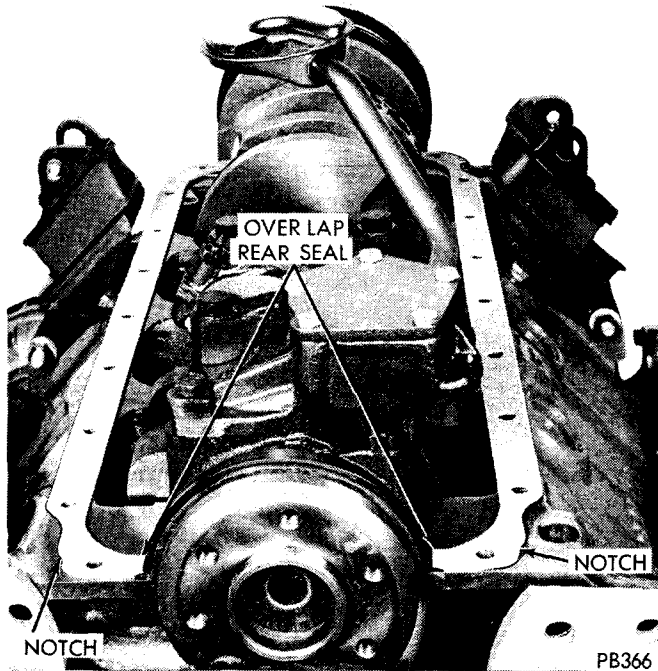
Oil Pan Gaskets and Rear Seal Installation
